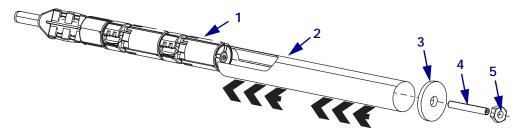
• Remove the Ribbon Supply Spindle Mounting Screw
